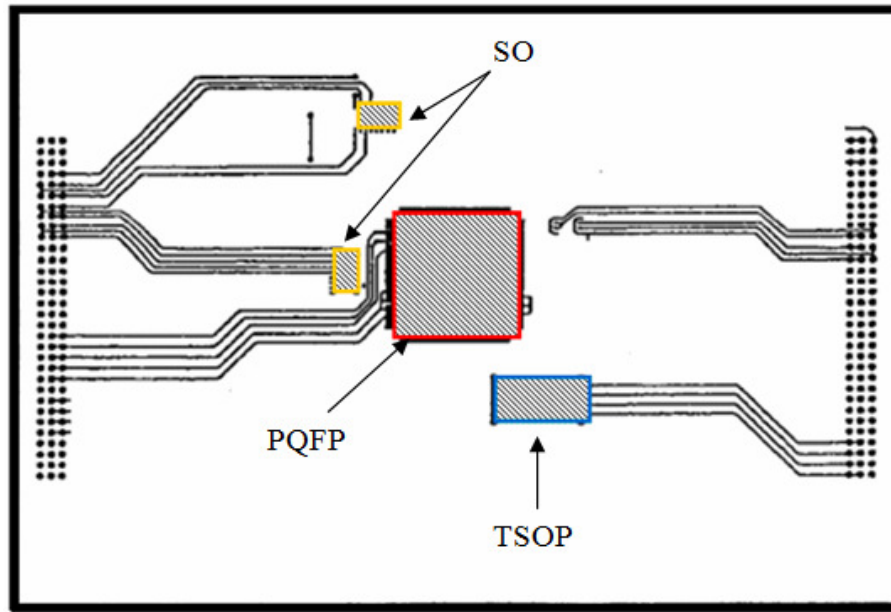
Multi-component test PCB component location and copper traces [22]
